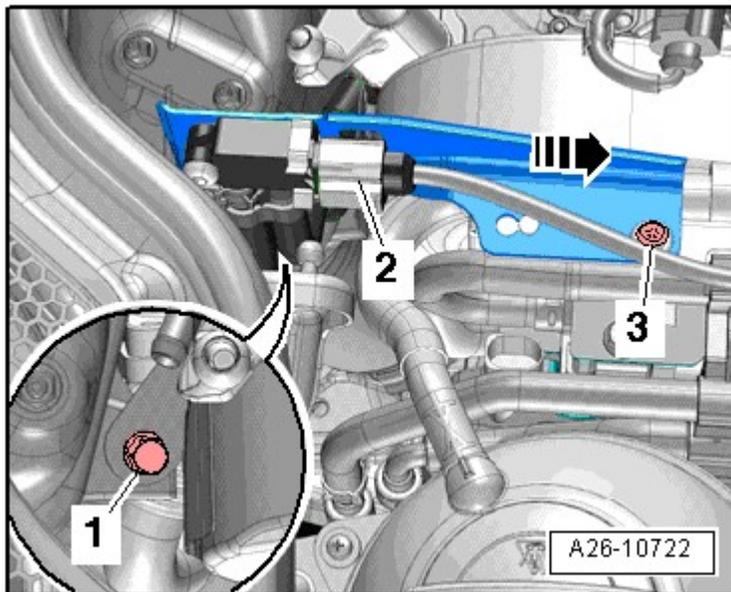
Disconnecting Connector -2- On Exhaust Pressure Sensor 1 -G450
